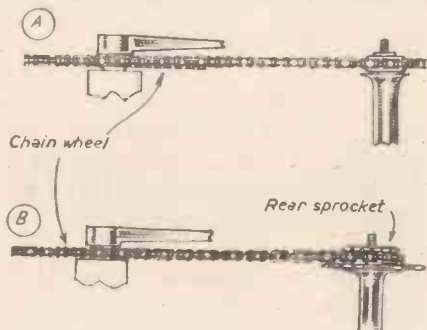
(A). Unaligned chain; (B) lining up with a derailleur gear.
